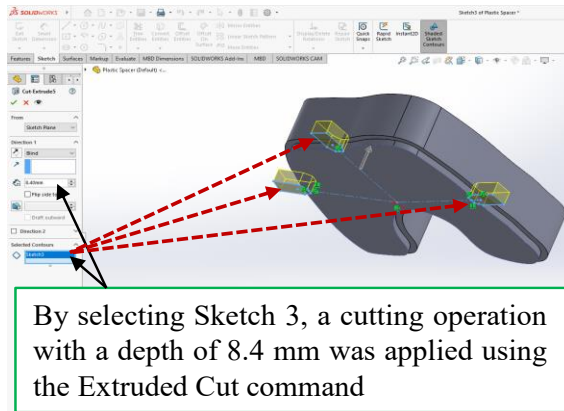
Performing an 8.4 mm deep cut on Sketch 3 of the Plastic Spacer component using the Extruded Cut command.
